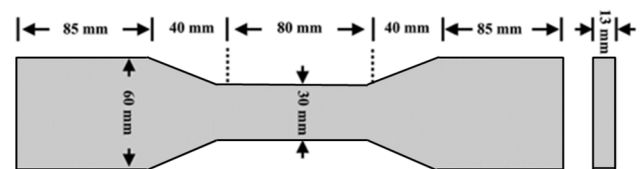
Dimensions of dogbone-shaped specimen for uniaxial tension.
